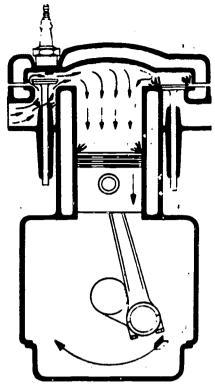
On the intake stroke, leakage can occur around the exhaust valve, cylinder head gasket, valve guide, manifold gaskets and piston rings.
